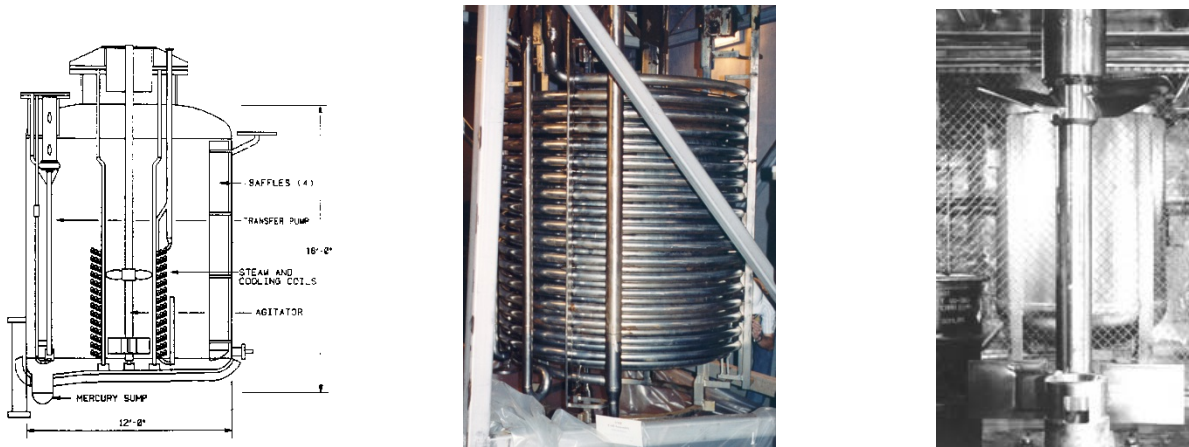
Schematic of SME vessel and photographs of the coil and agitator assembly (modified agitator assembly with fully welded blades) [35].
